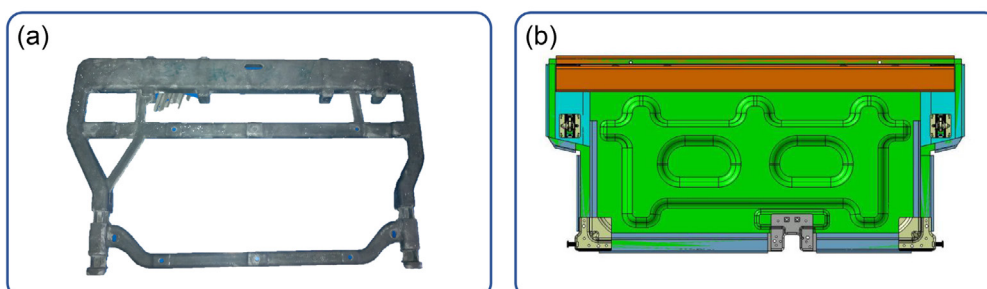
Typical Mg alloy seat back frame: (a) die casting structure; (b) stamping panel structure^[13]
